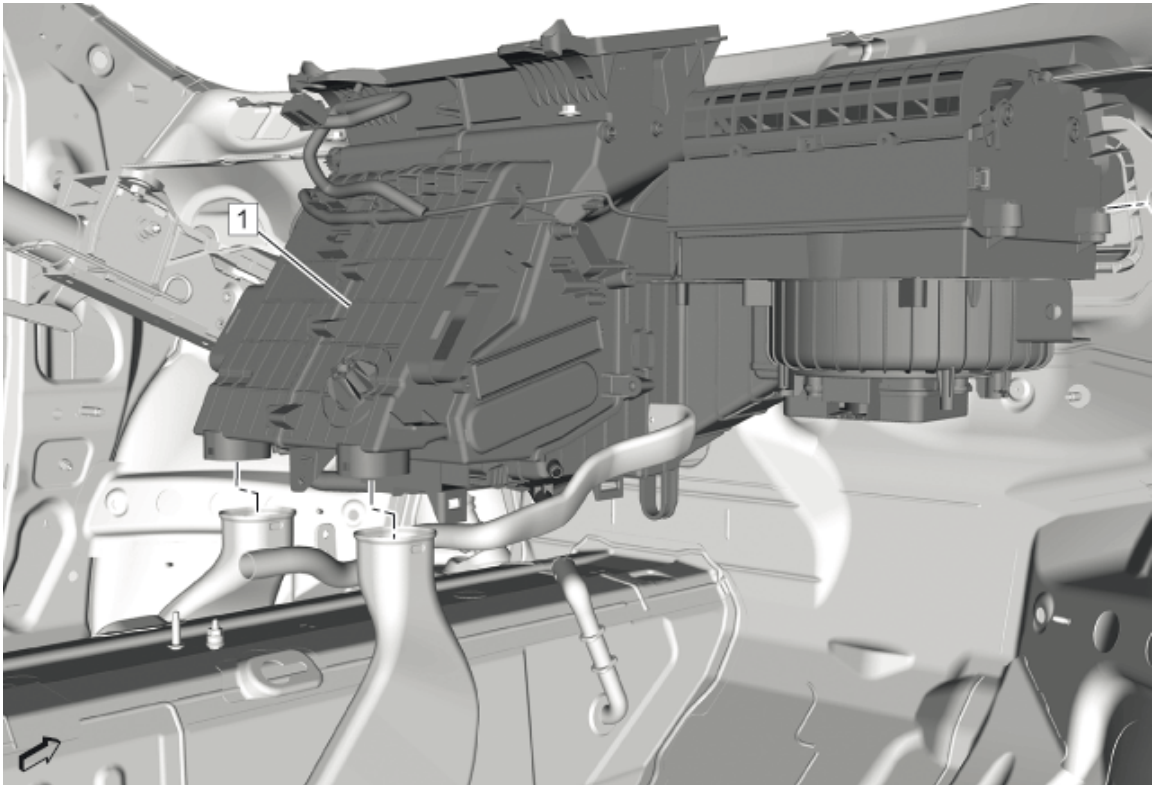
Heater And Air Conditioning Evaporator And Blower Module
